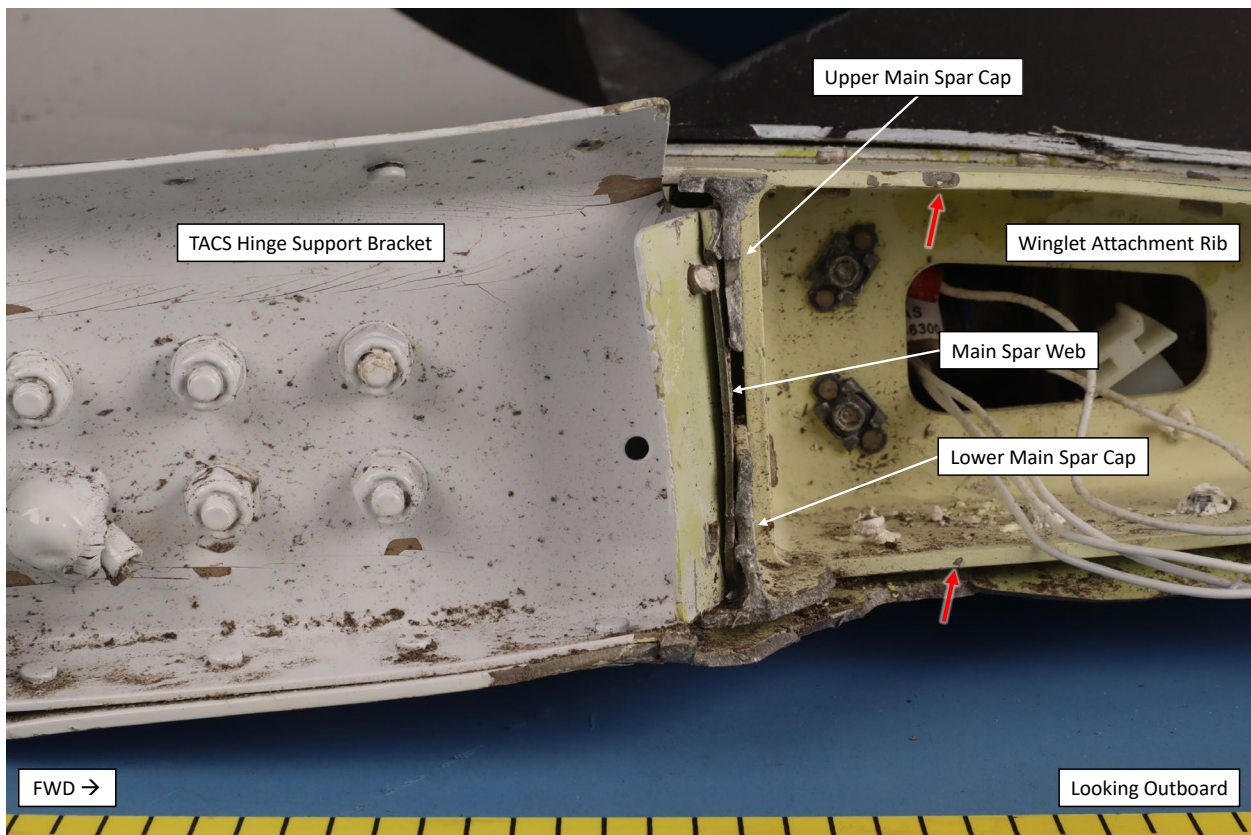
Photograph of the wing extension main spar fracture (outboard location) in the as received condition. Red arrows indicate contact marks on the inboard edges of the winglet attachment rib, forward of the main spar.
